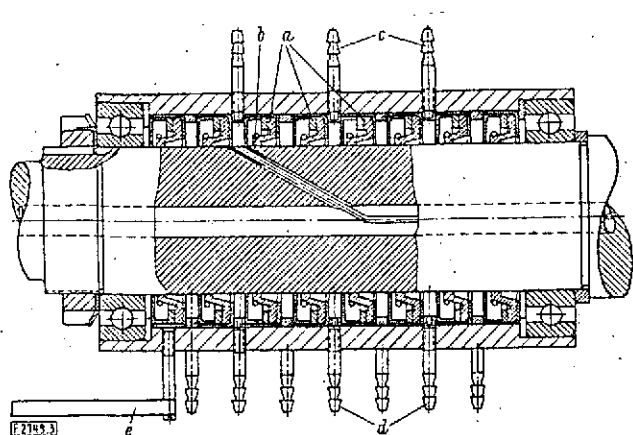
Pressure Converting Device. a o-rings, b small pressure measuring tubes connected with the probe, c tubing nipples, d nipples for attaching closed-end plastic tubes for oil-leak detection, e housing support.
